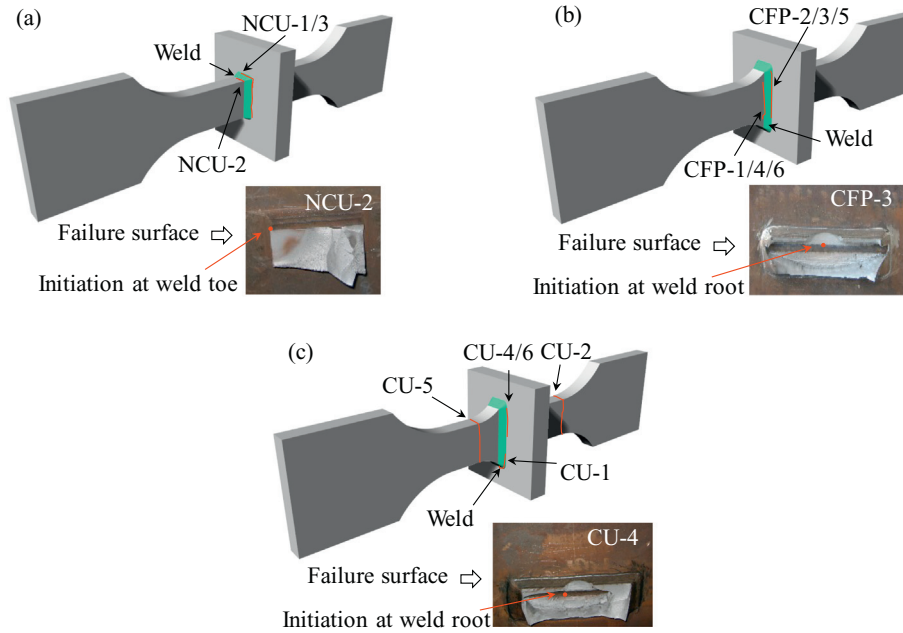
Sketch of the failure modes and crack surfaces of the cruciform welded joints: (a) NCU specimen; (b) CFP specimen; (c) CU specimen.
